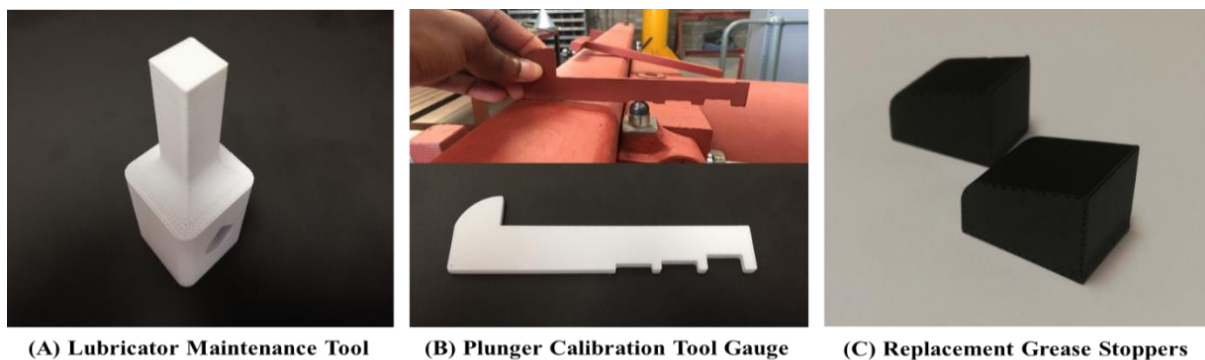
3 3D Printed Replacement Parts for the Lubricator Equipment [10]
